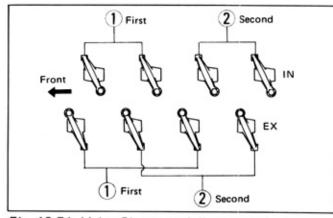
Valve Clearance Adjustment Order (2T-C)
